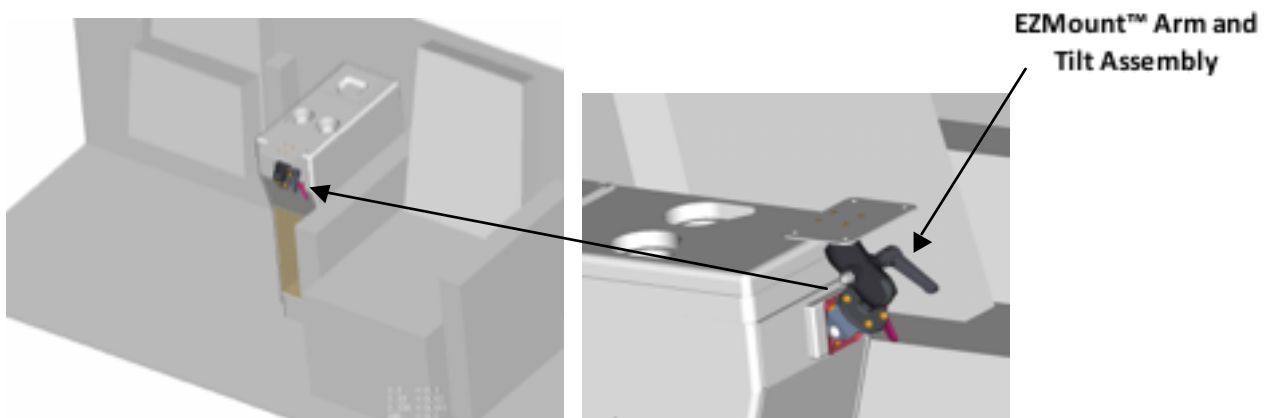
OBSERVERS CENTER MONUMENT WITH EZMOUNT™ ARM AND TILT ASSEMBLY
